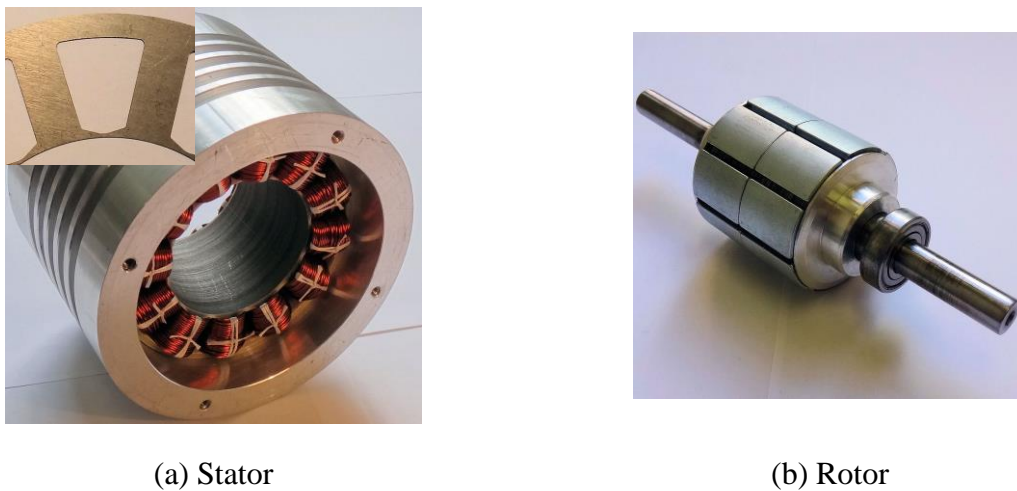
Photos of prototype machine, (a) stator, (b) rotor.
